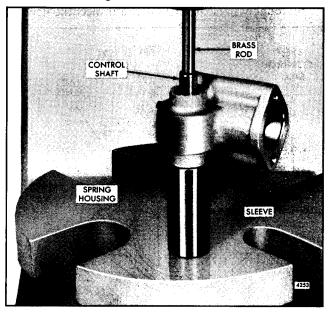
Removing Speed Control Shaft, Bearing and Cup plug from Governor Spring Housing
